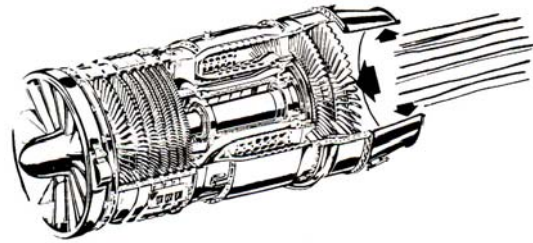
showing turbine engine as a cylinder of turbomachinery with unbalanced forces pushing forward.
